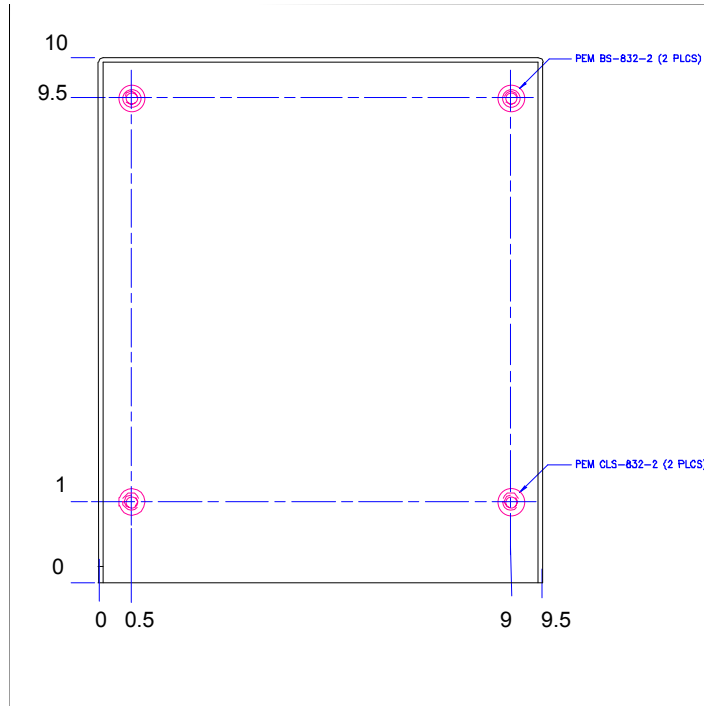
Physical layout showing the placement of mounting holes on the bottom panel of 2600 power supply
